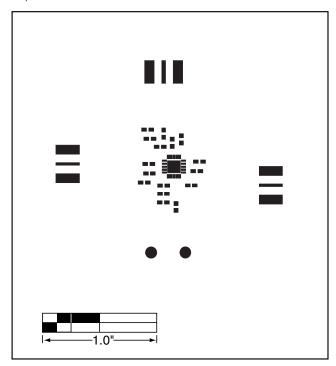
MAX9989/MAX9990 EV Kit PC Board Layout—Top Soldermask
